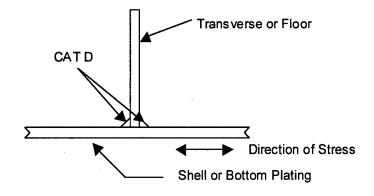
Transverse Frame or Floor at Shell or Deck CAT D
